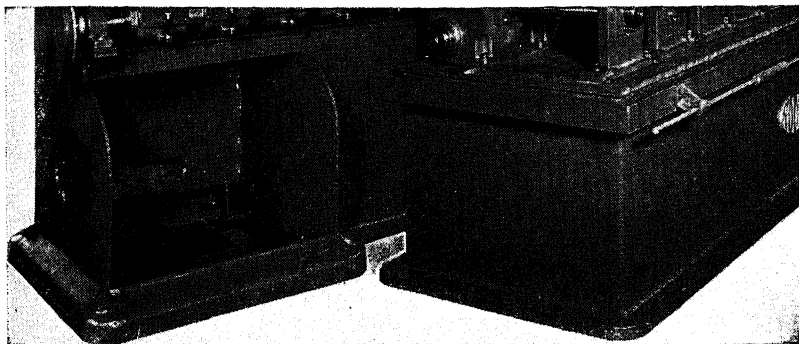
Base of a cold rolled forming machine showing two methods of approach. Left: A welded steel design which simulates the former cast iron construction. Sides and bottom are of one piece, brake-formed with cast steel inserts welded into the corners. Stiffeners are welded into the flange at intervals. Right: The welded steel construction shown performs the same function yet its stream lined design, employing shear-cut and flame-cut plate costs materially less than the design which is made to look like cast construction.
